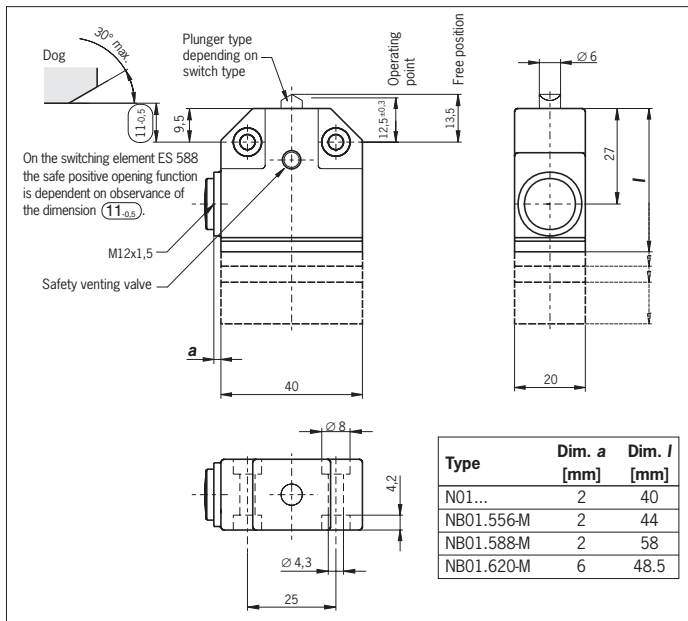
Dimension drawing NO1.../NB01... with cable entry
